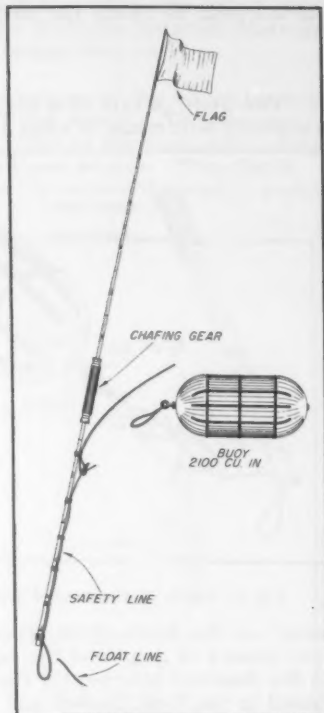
Complete flag and float assembly, showing chafing gear.
